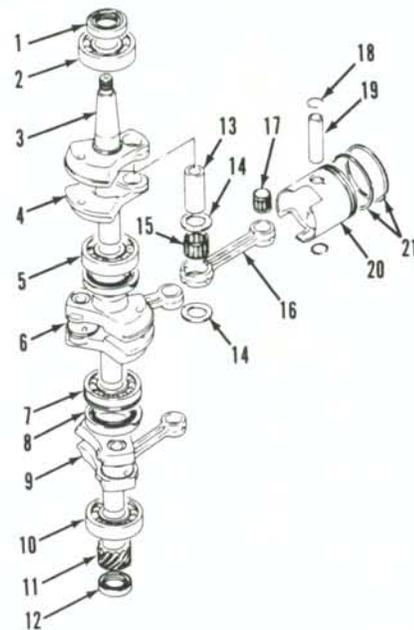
Exploded view of piston and crankshaft assembly.
